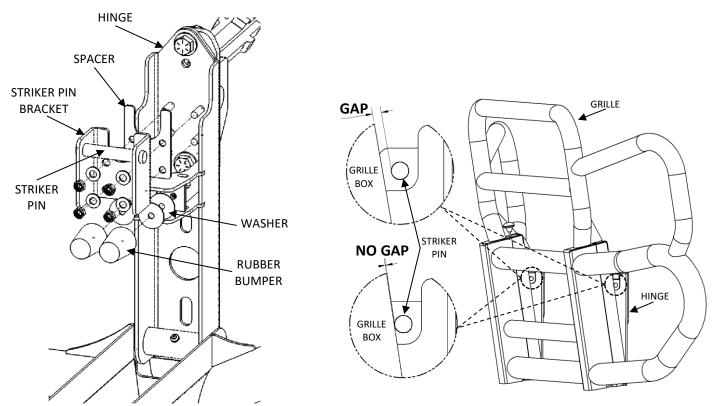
Hinge Assembly (Your Hinge Assembly may not be exactly as shown)
